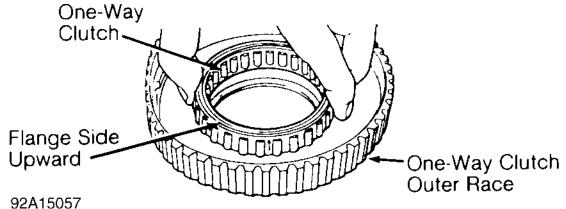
Installing One-Way Clutch Courtesy of Mitsubishi Motor Sales of America.
